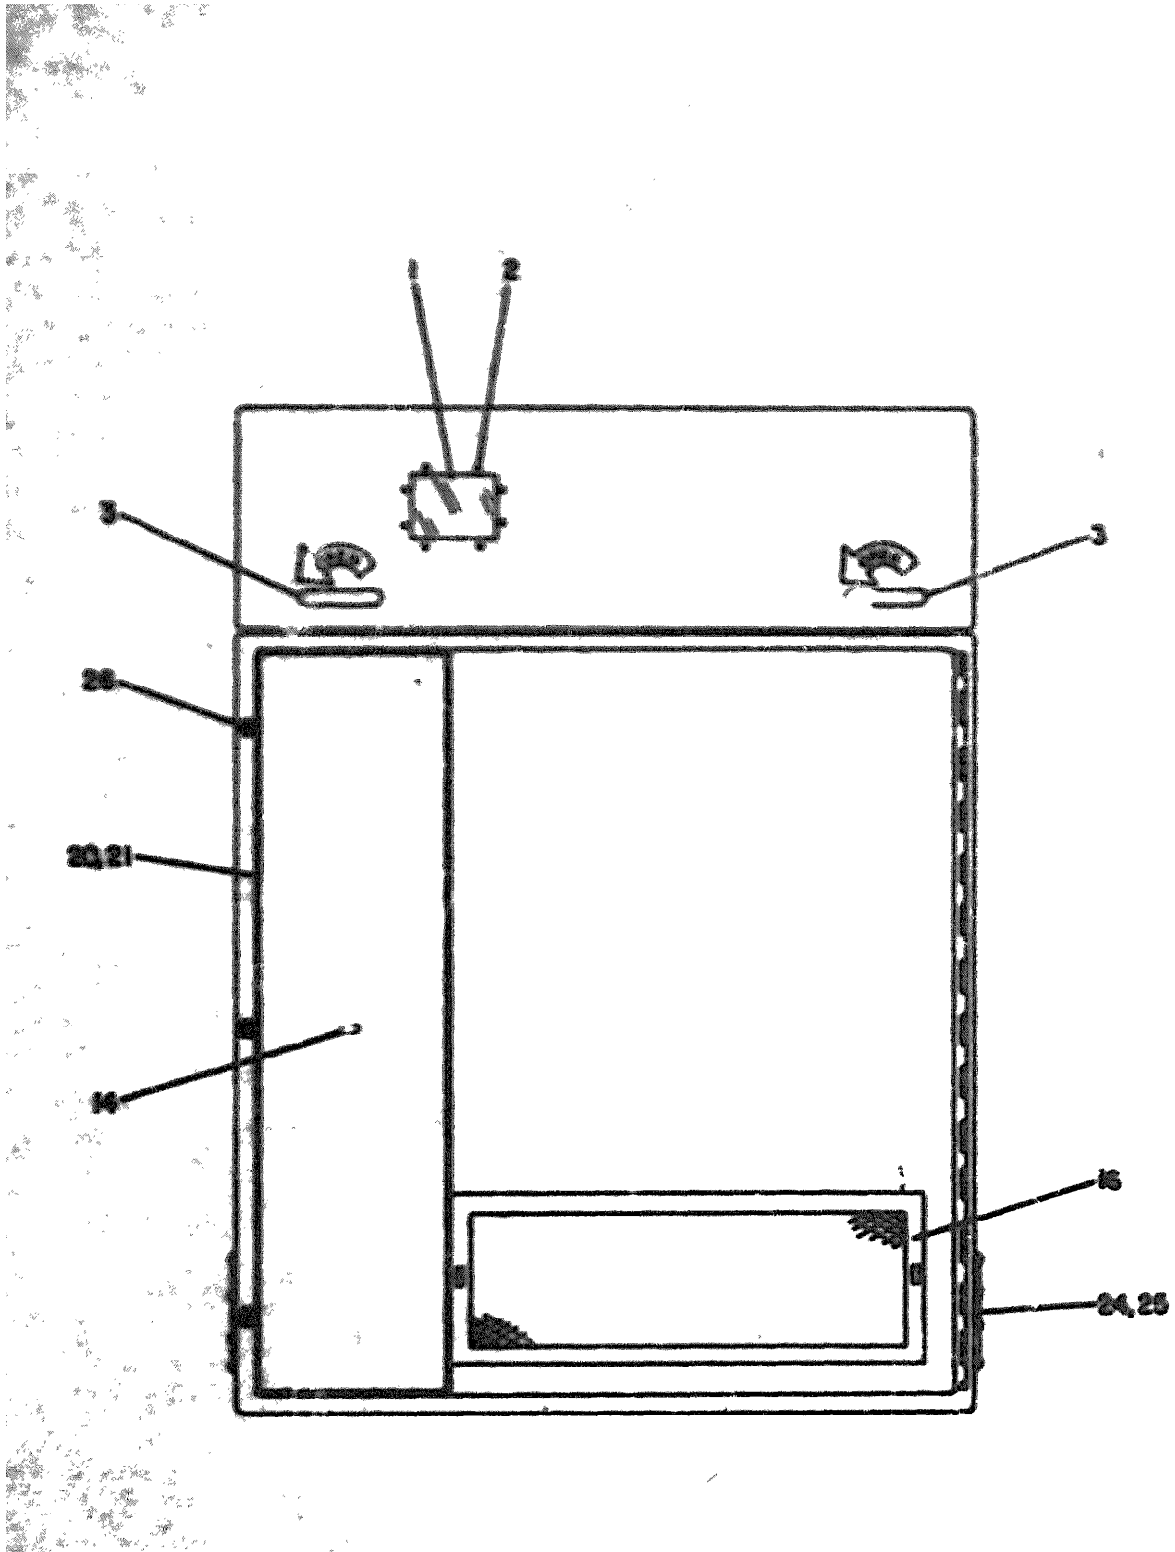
Cabinet, Electrical Equipment (EC-2460) (Sheet 1 of 2).
